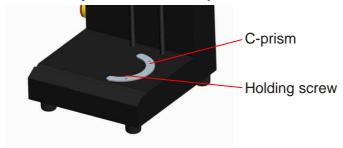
C-prism below the induction coil with holding screws and position of the tool holder
